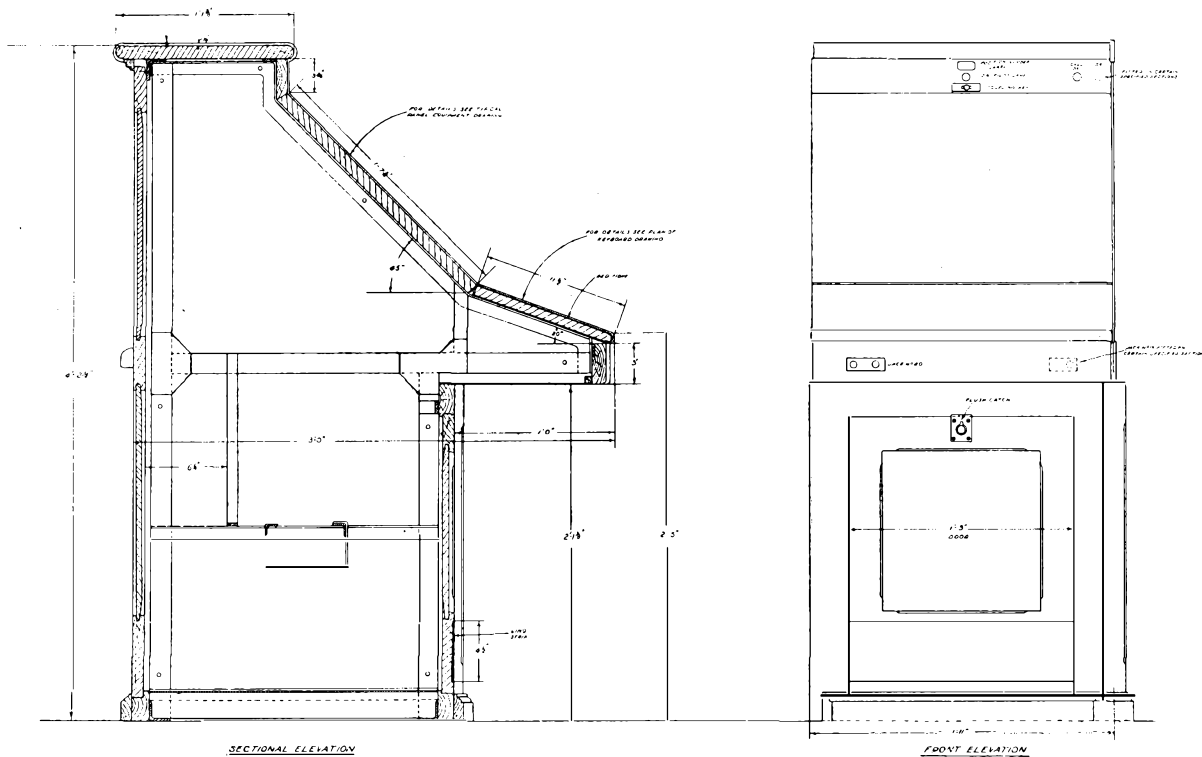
CROSS SECTION AND FRONT ELEVATION OF SECTION, CORDLESS B.
